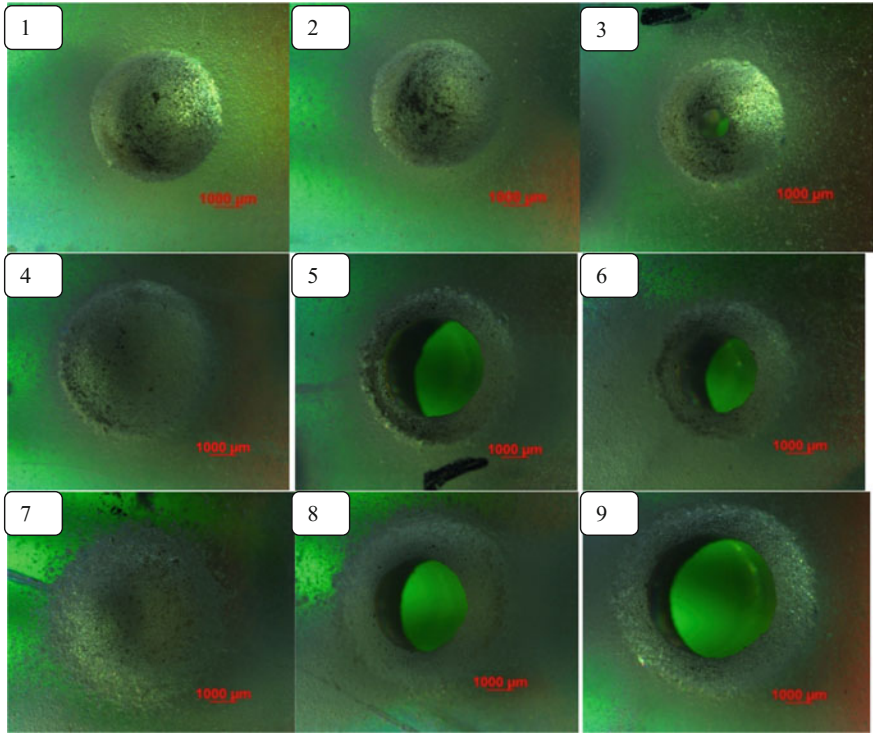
Microscopic views of the machined holes (using SiC) on glass
